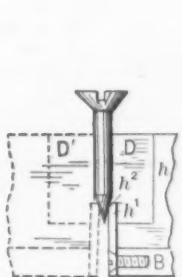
Manner of Supporting Blanks Between the Dies.
